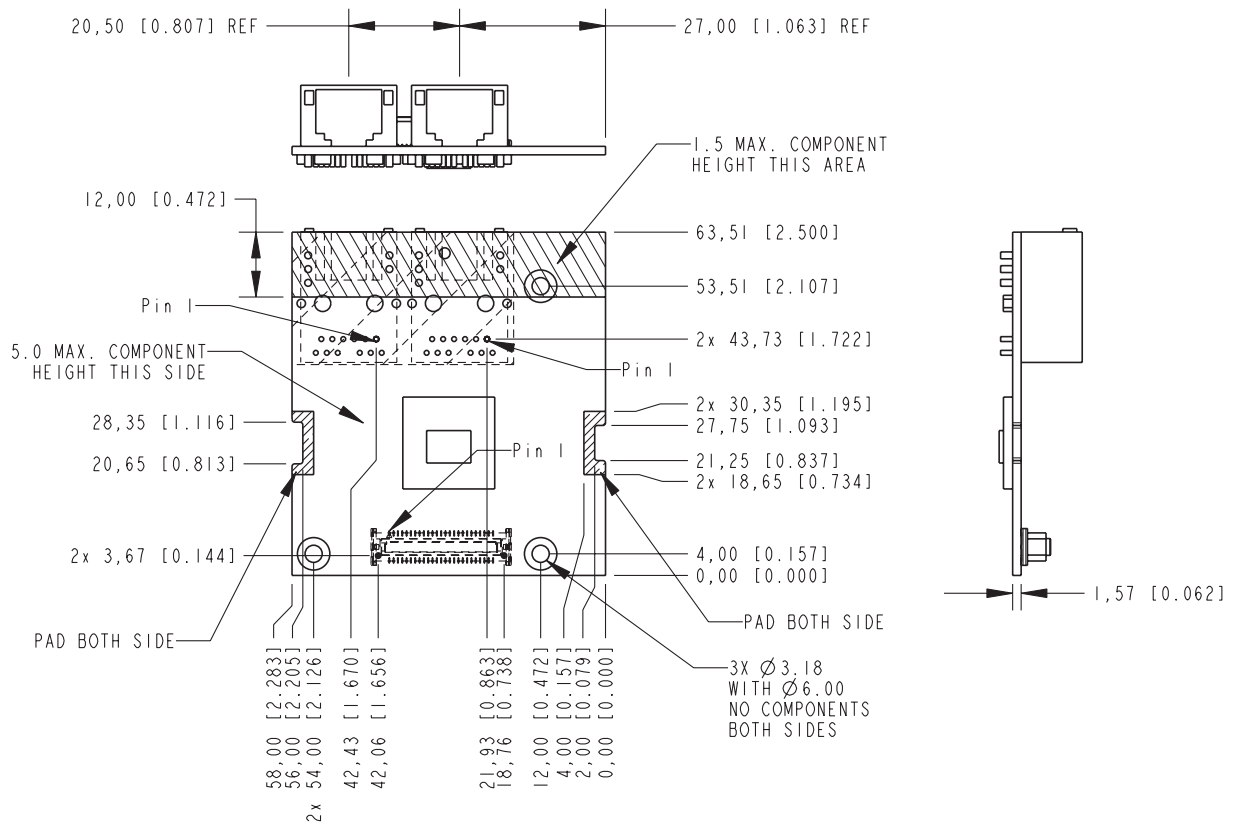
Dual Gigabit Ethernet I/O Module Dimensions; Top and Side Views
